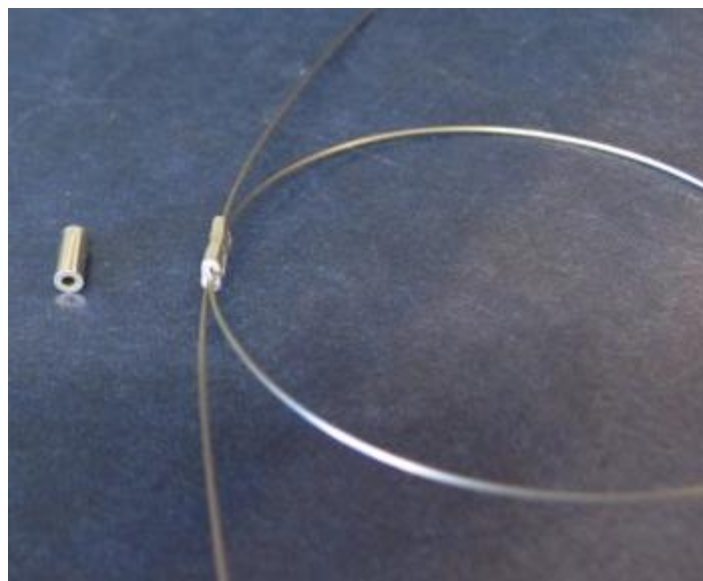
Crimp bead in as-received condition, alongside bead crimped to hold wire loop fixed.
